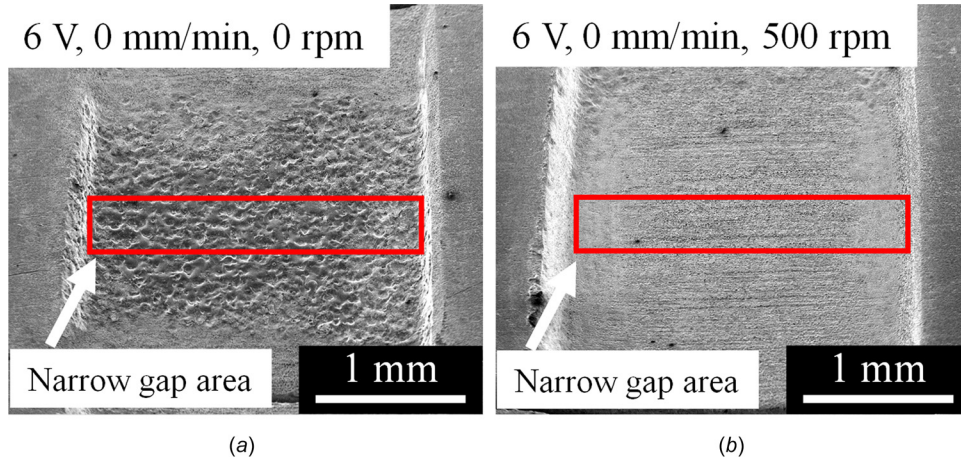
ECMed surface without tool feed for 3 min: (a) without tool rotation and (b) with tool rotation
